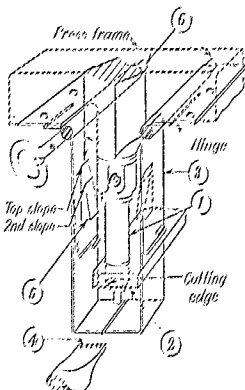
Oscillating shelves to assist air blast to eject parts or scrap from die. (P. W. Carter.)
